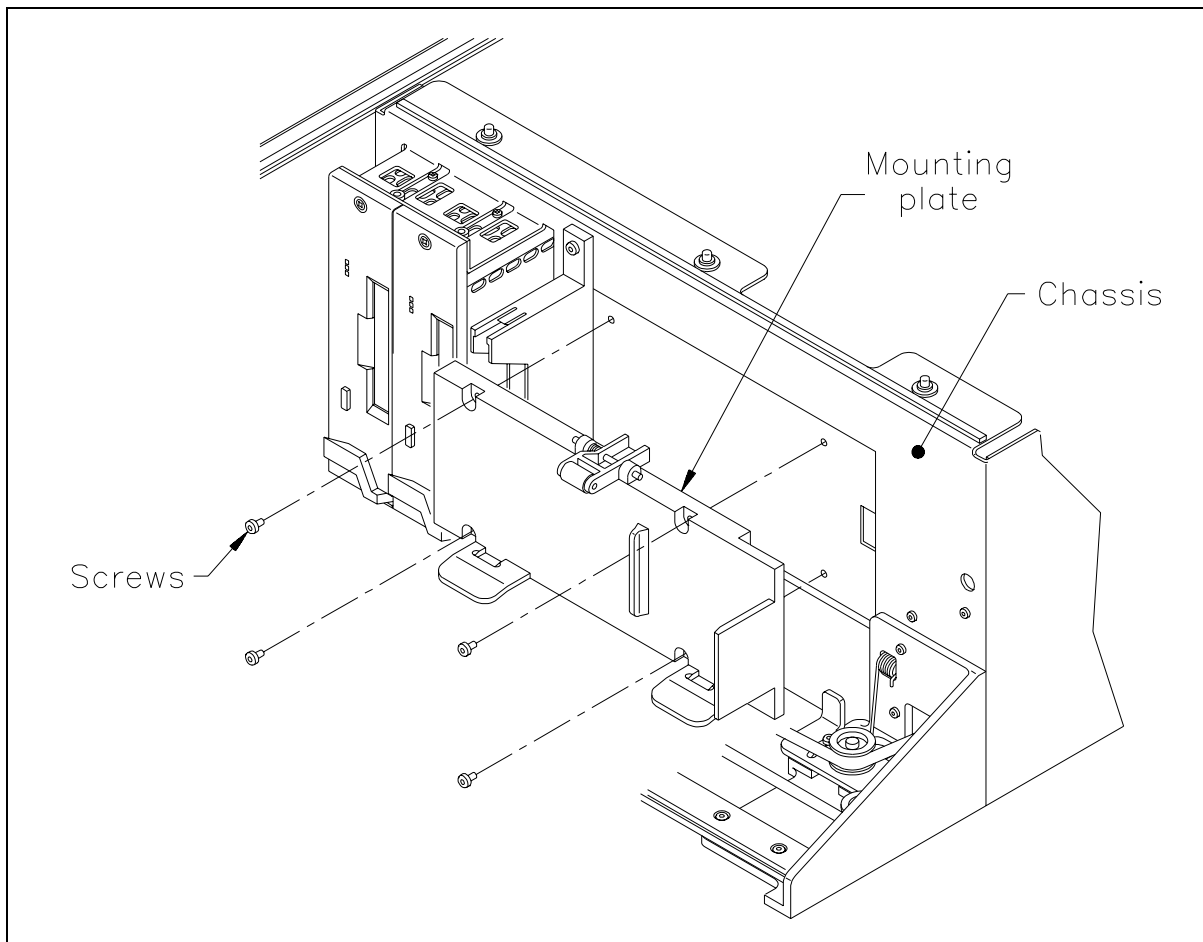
EXB-018 and EXB-218: Removing the data cartridge magazine mounting plate
